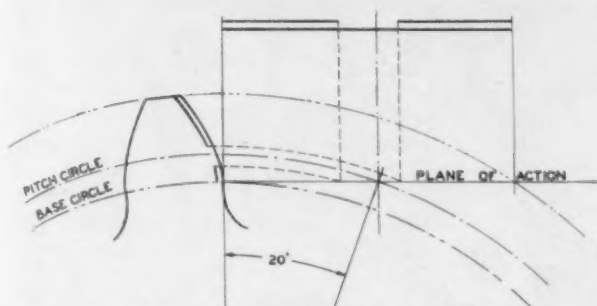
shows the action of a shaving cutter on a 16-tooth gear in the plane of rotation. The dotted line in the tooth space shows the path of the shaving cutter tip as it comes into contact with the gear. It is this corner which gives the characteristic groove near the base of a burnished or shaved gear. The depth of this groove is reduced by hobbing the involute form deeper than the shaved form, either by the use of lower pressure-angle hobs, as previously mentioned, or protuberance hobs.
